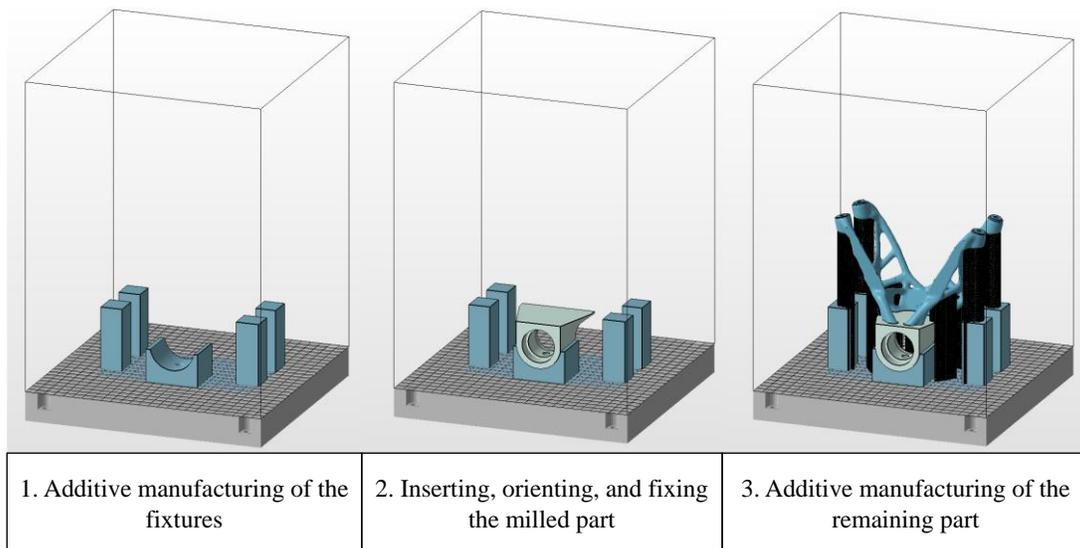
Concept for integrating milled parts into the additive manufacturing process.
